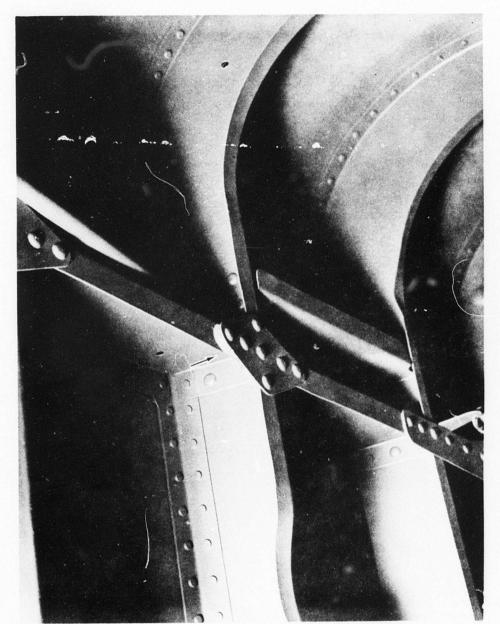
Main Rotor Pylon, Structural Damage, Popped Rivets,
